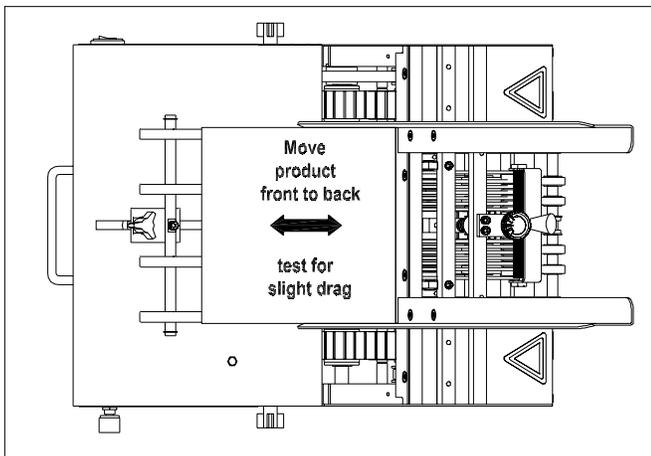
Using One-Piece Thickness of Product to Set Gap
